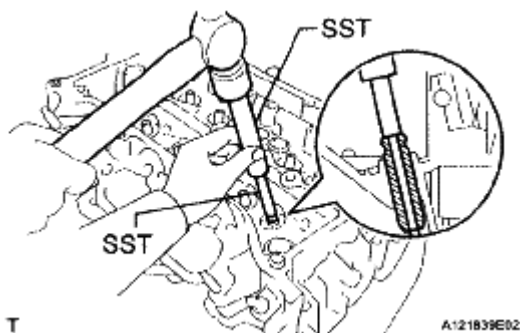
Using SST & Hammer To Tap Out Intake Valve Guide Bushes
